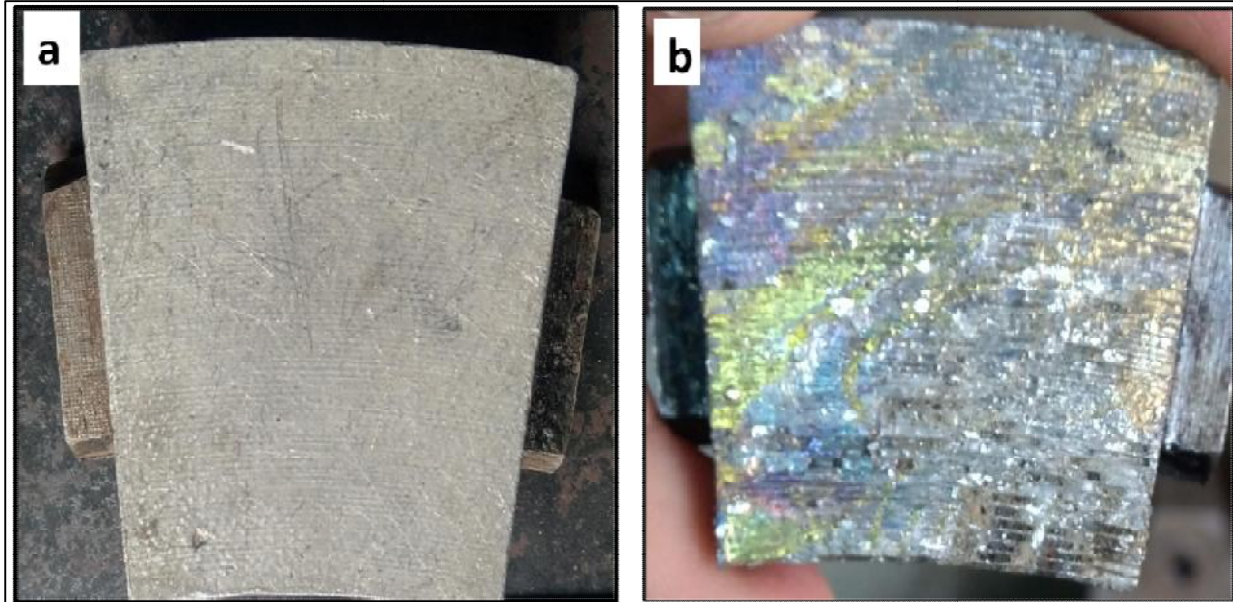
(a) Procured sector shape pad (b) Surface appearance of the pad after removing the Babbitt coating
